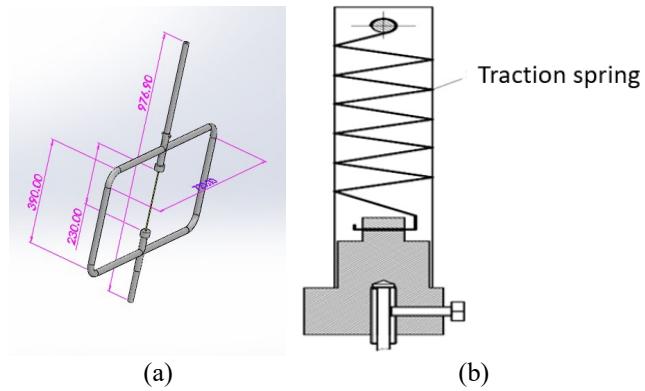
Wire tensioning mechanism, (a) wire frame, (b) tensioning actuator.
